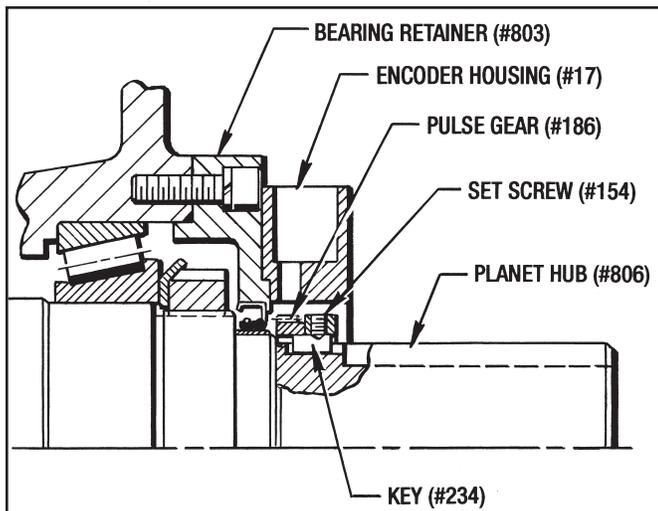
Pulse Gear Alignment (#20 with Reducer)
